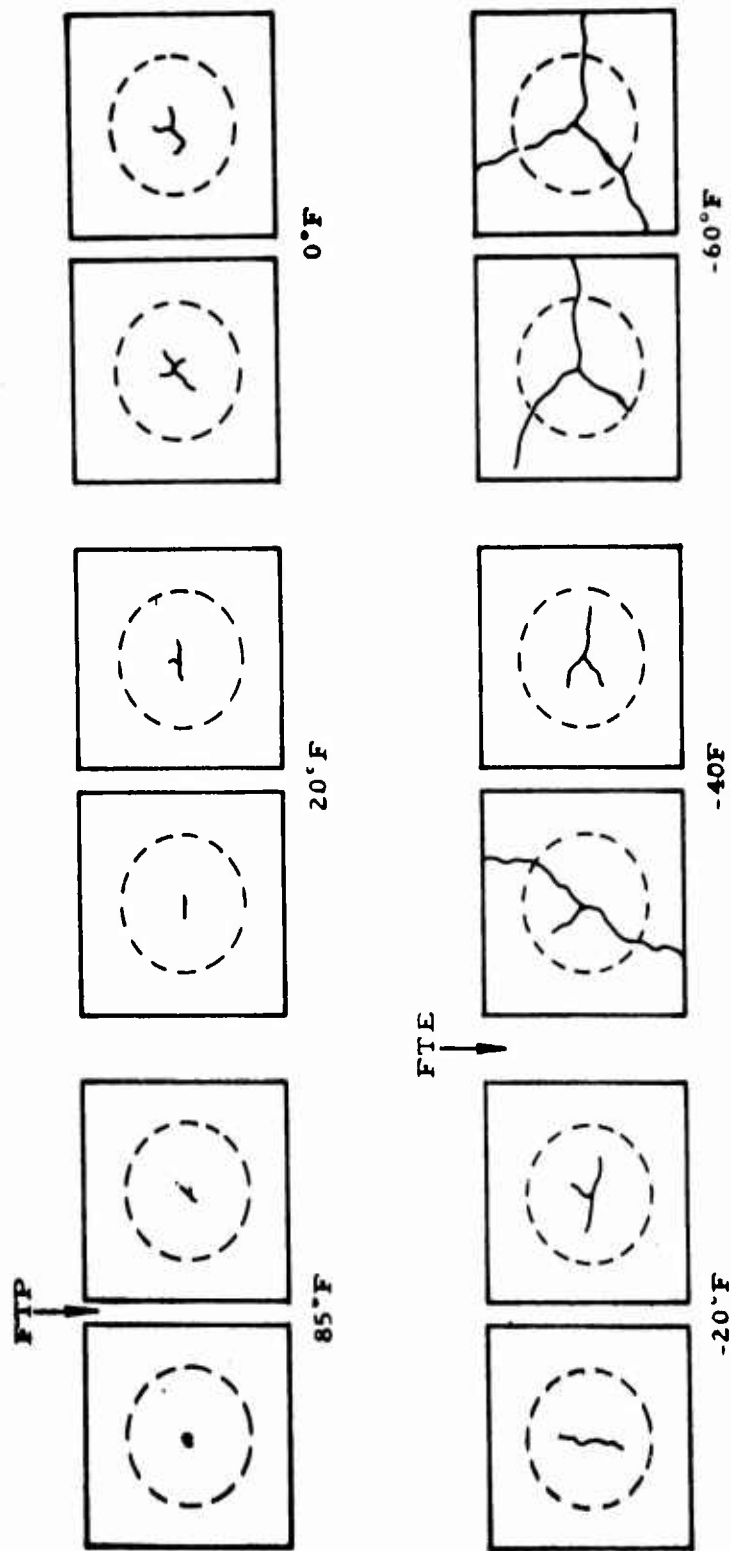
EXPLOSION CRACK STARTER BULGE TEST RESULTS OF STEEL 32
